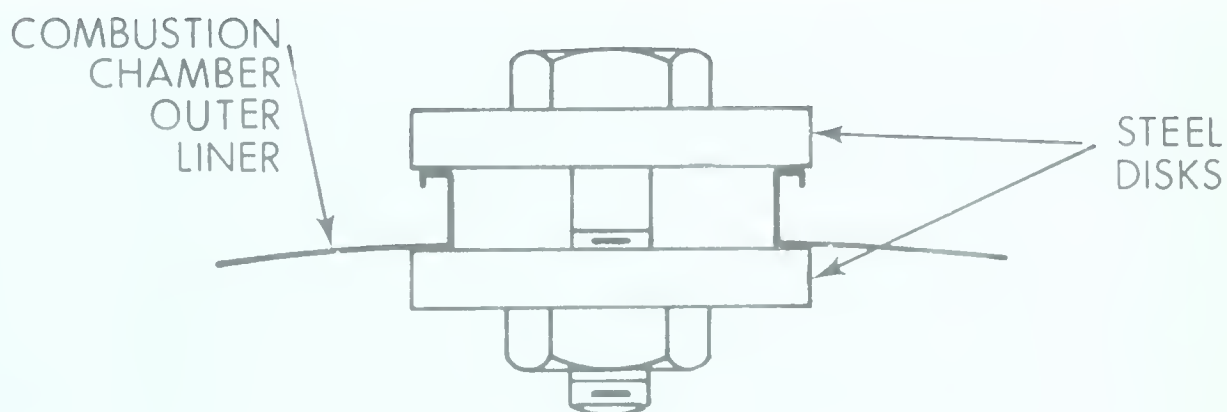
METHOD USED TO BLOCK EXTRA FLAME JUMP HOLES
